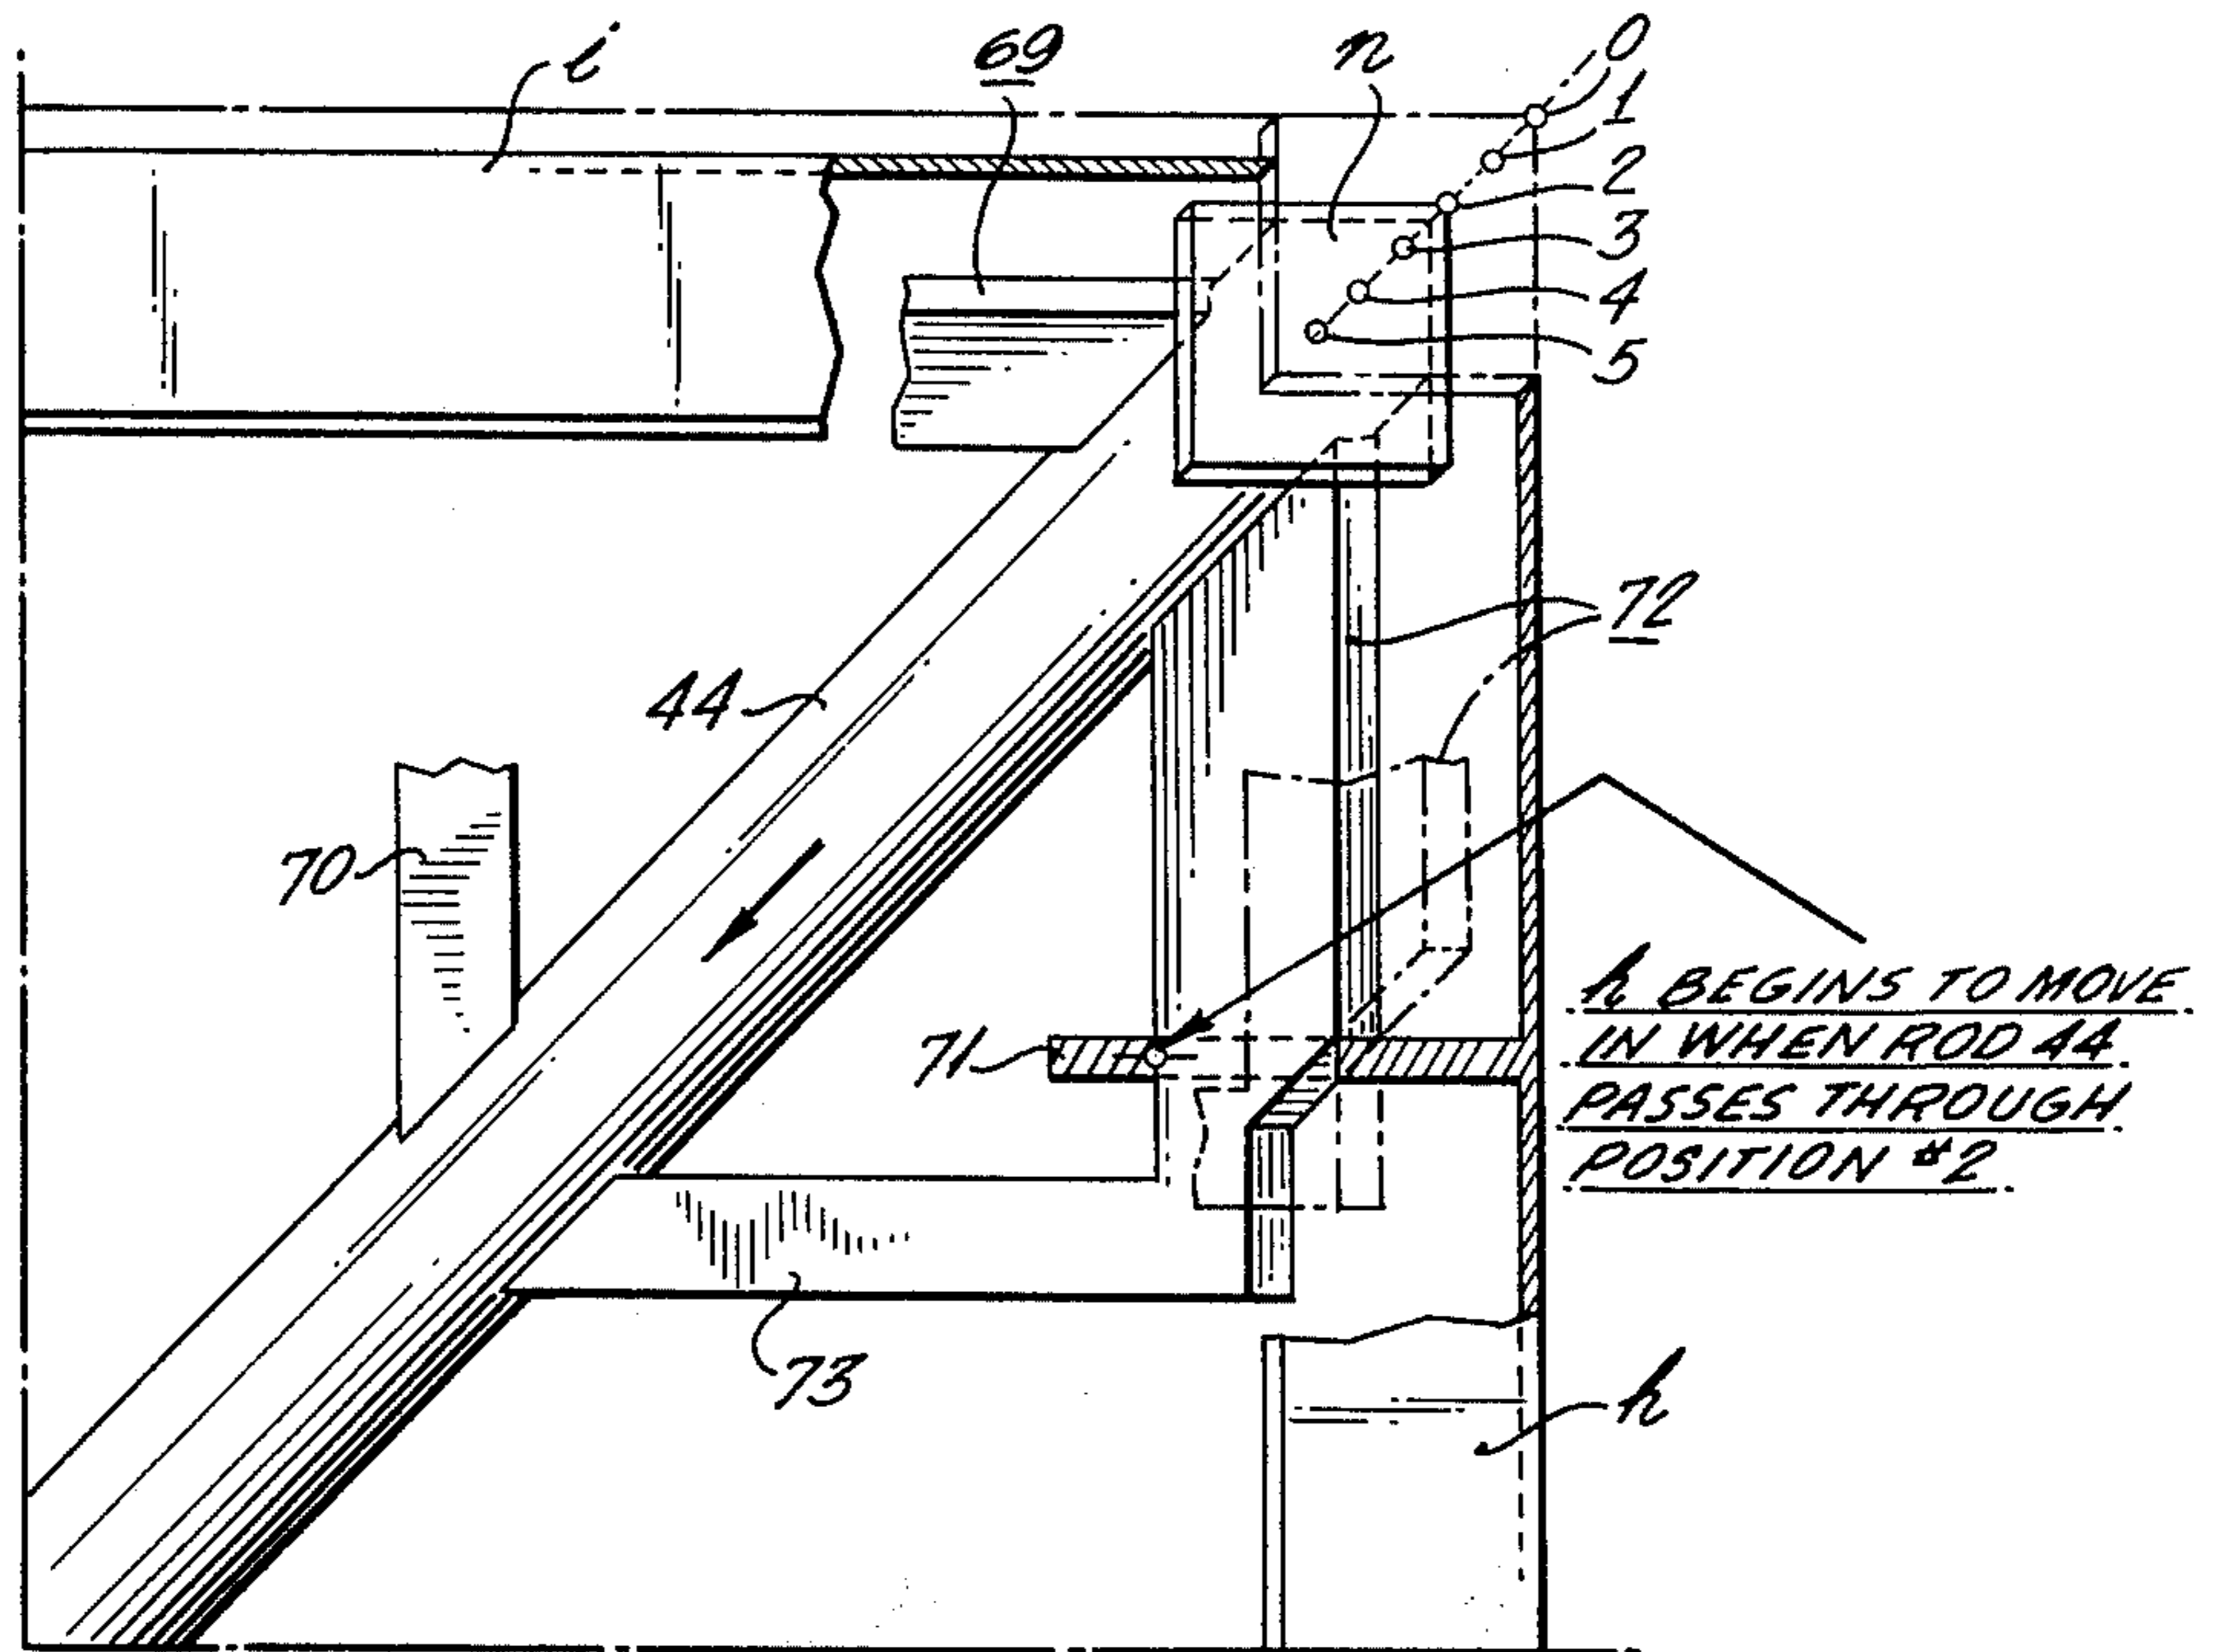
PLAN VIEW, ROD 44 RETRACTED TO POSITION #3
